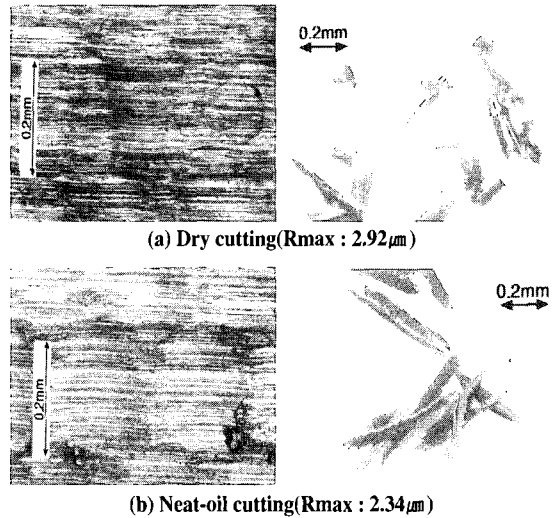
Machined surface and chips for Dry and Neat-oil cutting (after 34m of cutting)
